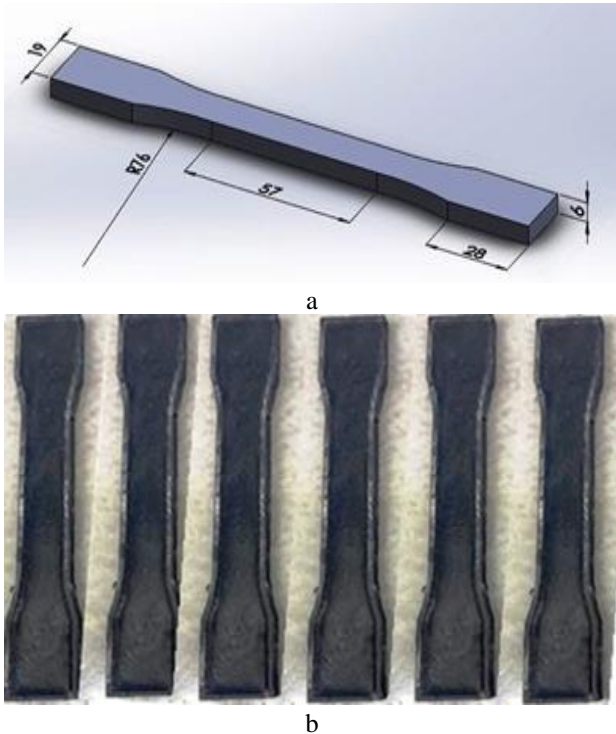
(a) Dimensions of the tensile sample (mm) following ASTM standard D638 [20]. (b) Manufactured polymer tensile test specimens.
